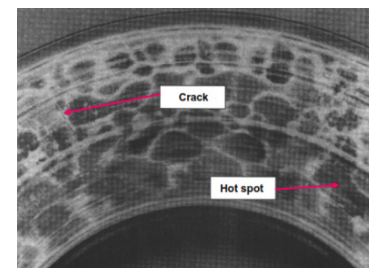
Thermal fatigue cracks on the surface of a disc brake made of grey cast iron, [2]
